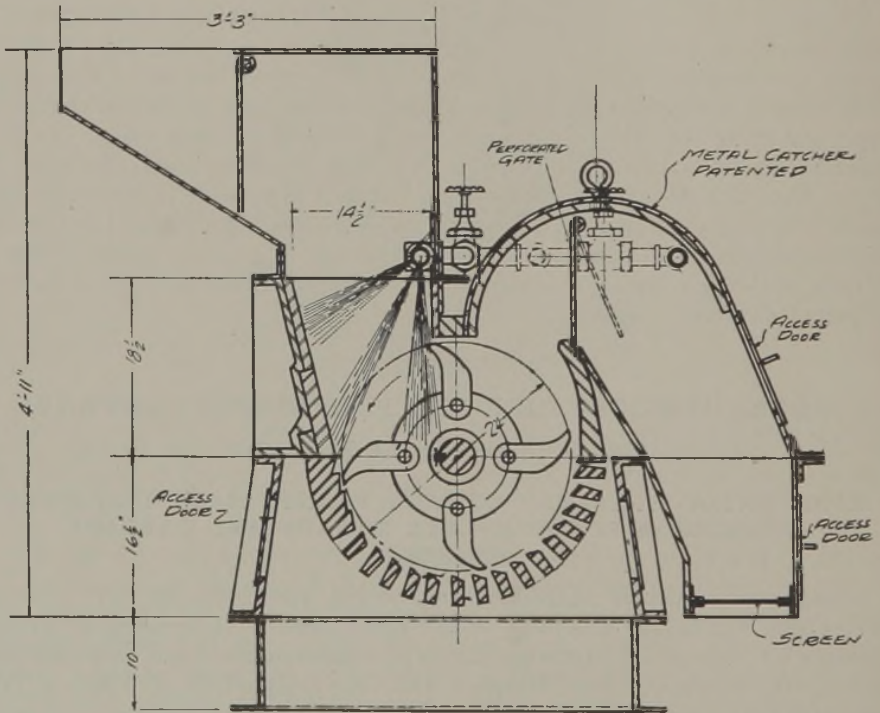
(below)—Special design Gruendler Garbage Shredder.
